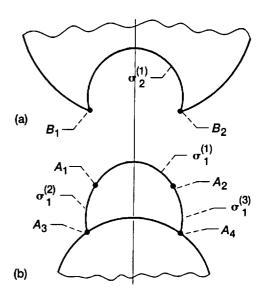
Cross-sectional profiles of rotors 1 and 2. (a) Driven rotor. (b) Driving rotor.
